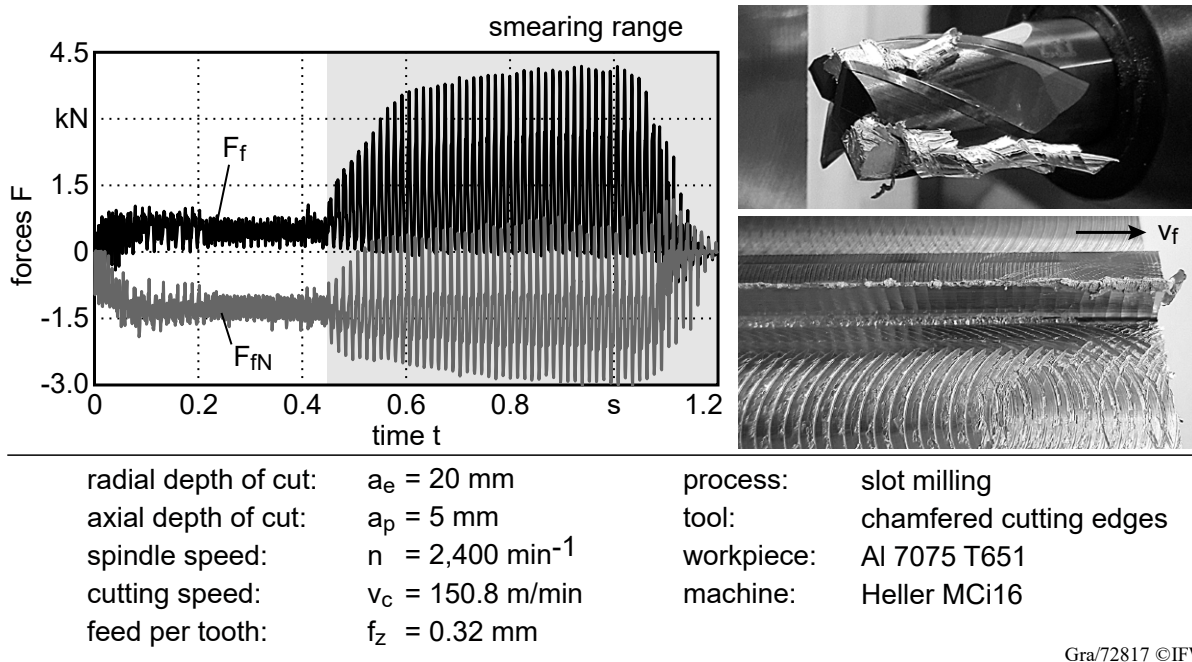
Smearing caused by the end mill with chamfered cutting edges at high feed per tooth.
